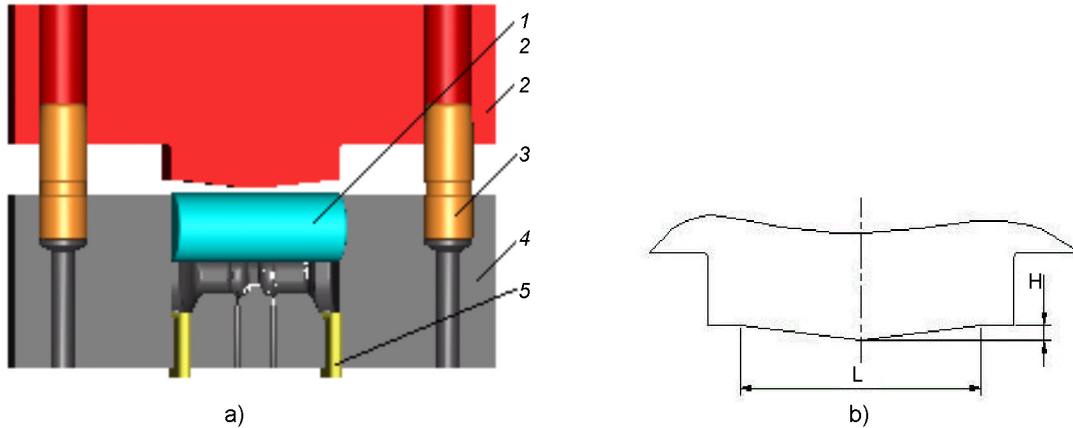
Schematic drawing of pre-forging die. (a) The structure of the pre-forging part of punch. 1-blank, 2-punch, 3-guide pillar, 4-die, 5-push rod (b) The shape of working part of punch
